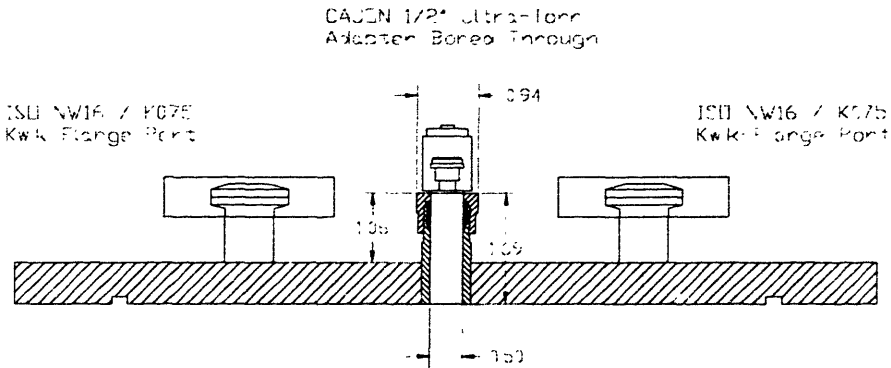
Side cutaway view of reactor lid, showing 1/2-in. o-ring port and NW16 ports.
